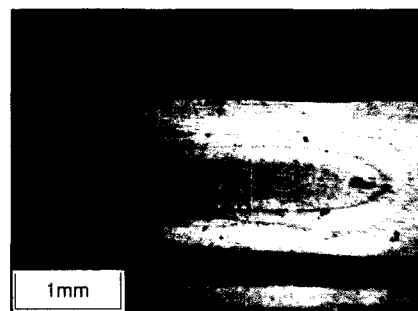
Weld cross section for Experiment 1-2(S)
